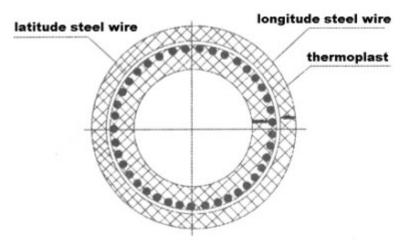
section drawing of Steel mesh reinforced PE pipe and fitting
